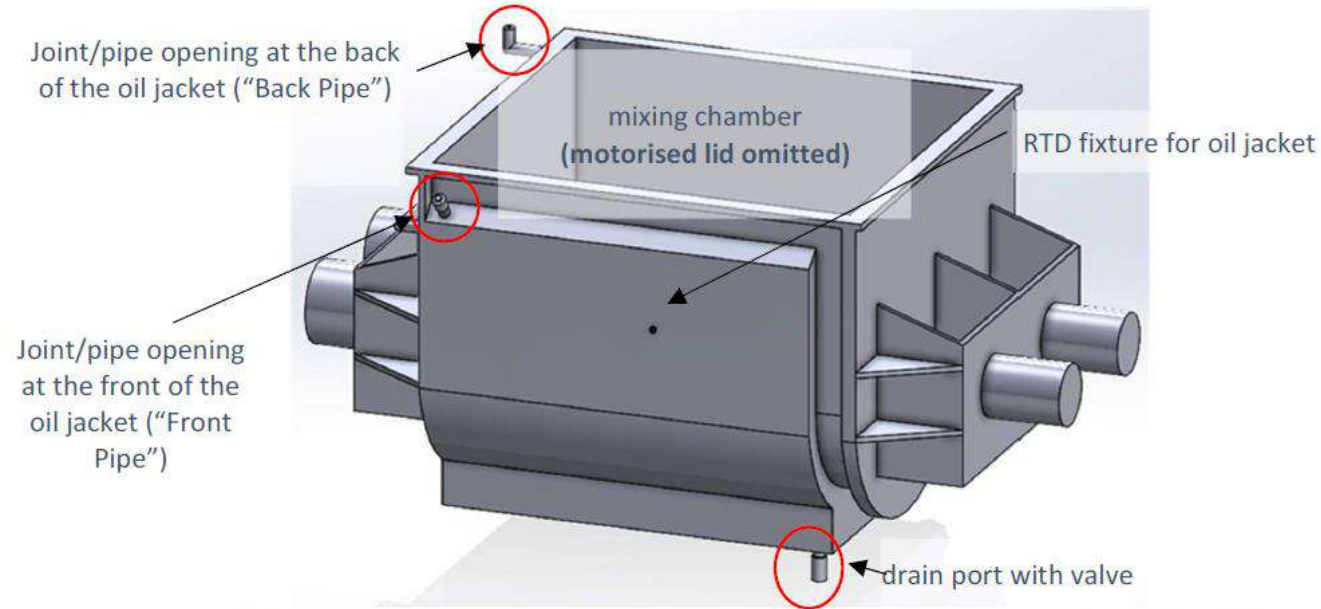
Front view of mixer machine with the three openings on oil jacket circled in red
